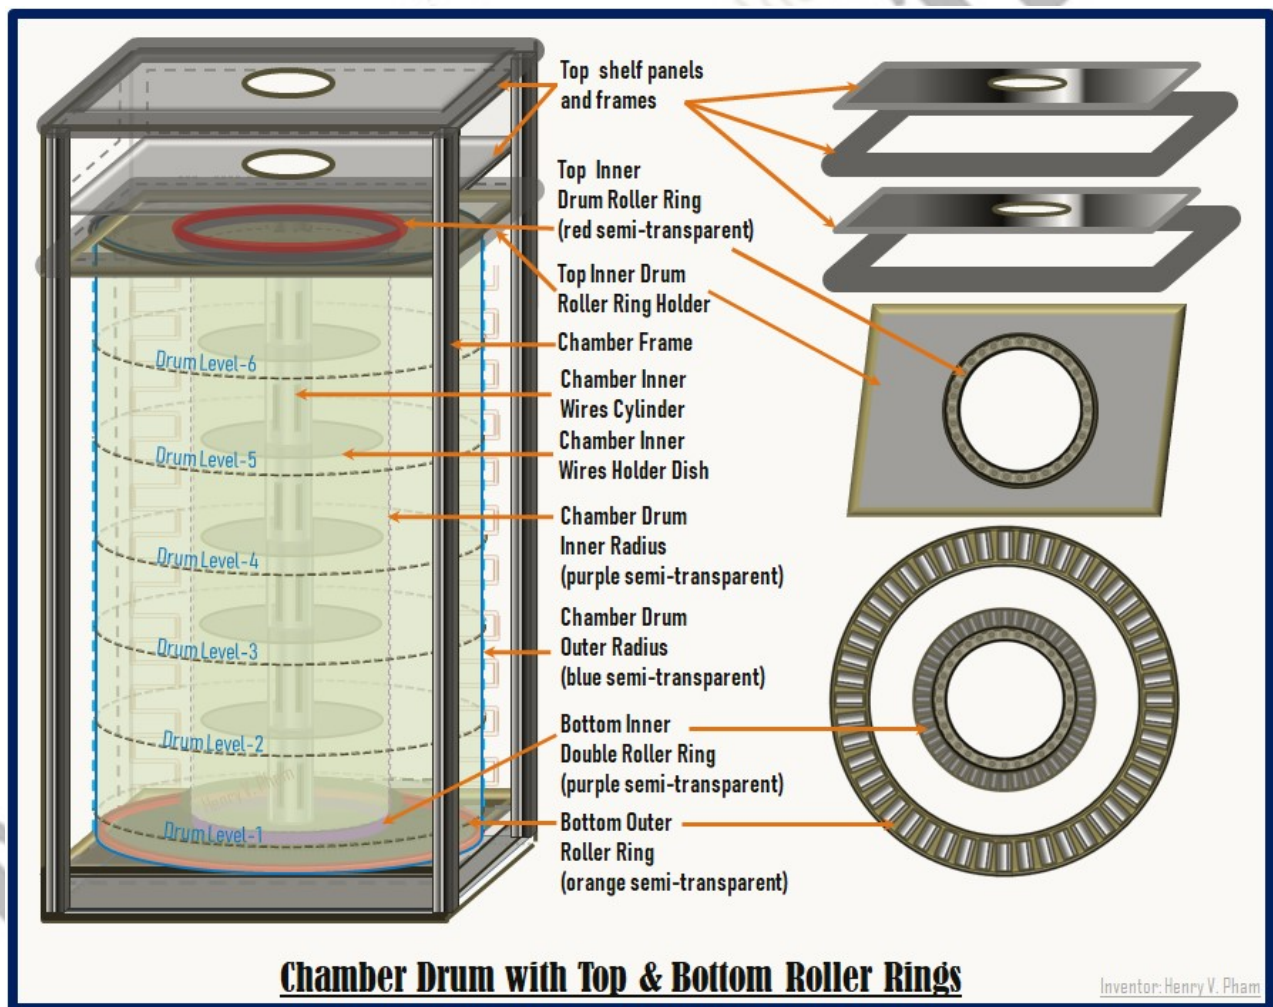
Rotatable Drum with Top & Bottom Roller Rings
